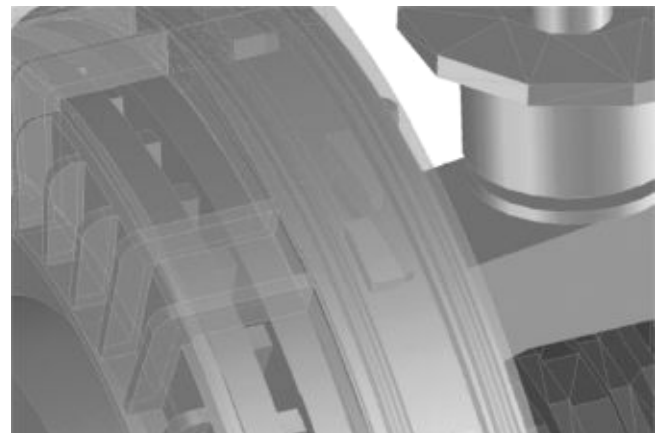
The CirCal brake's coaxial helical thread segments and exclusion seals
